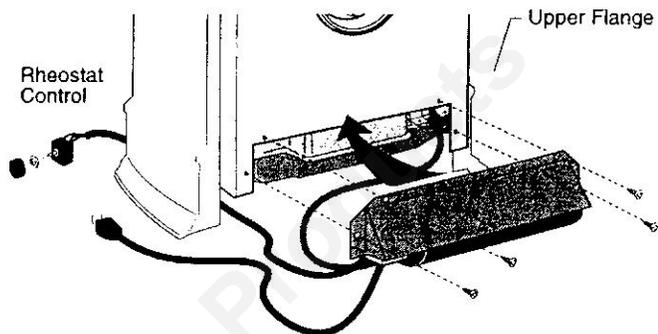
The upper flange of the fan skirt should be located behind the lower edge of the shroud.
